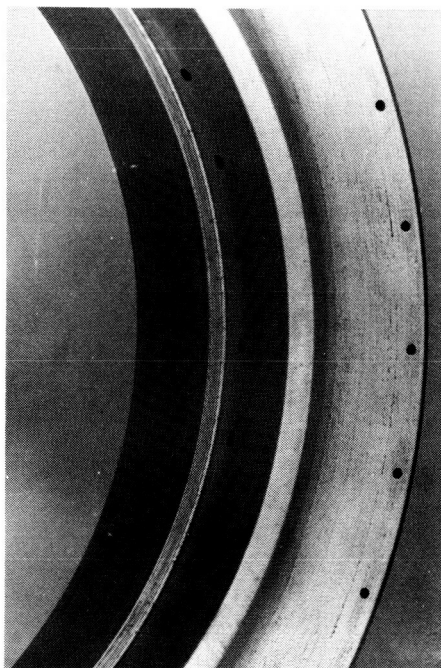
Rear View of the Spiral Grooved Seal Plate Used in the Hybrid Seal (CN-8281)
